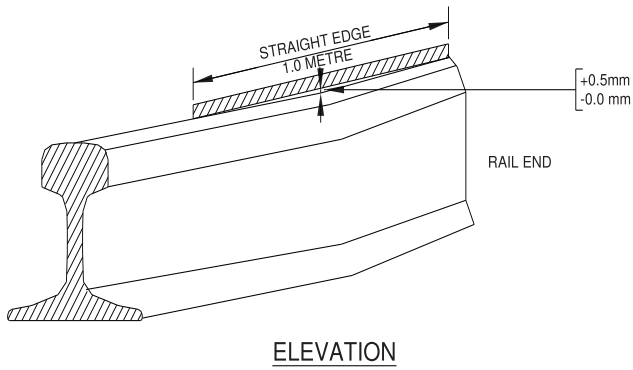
(a) Tolerance on the End Bends in the Vertical Plane
